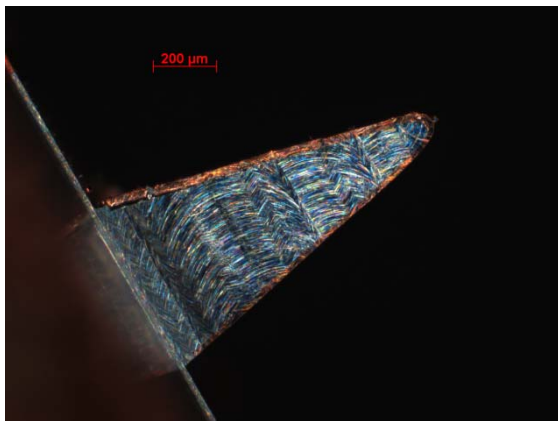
The sectioned copper cone on the sectioned aluminium mandrel
